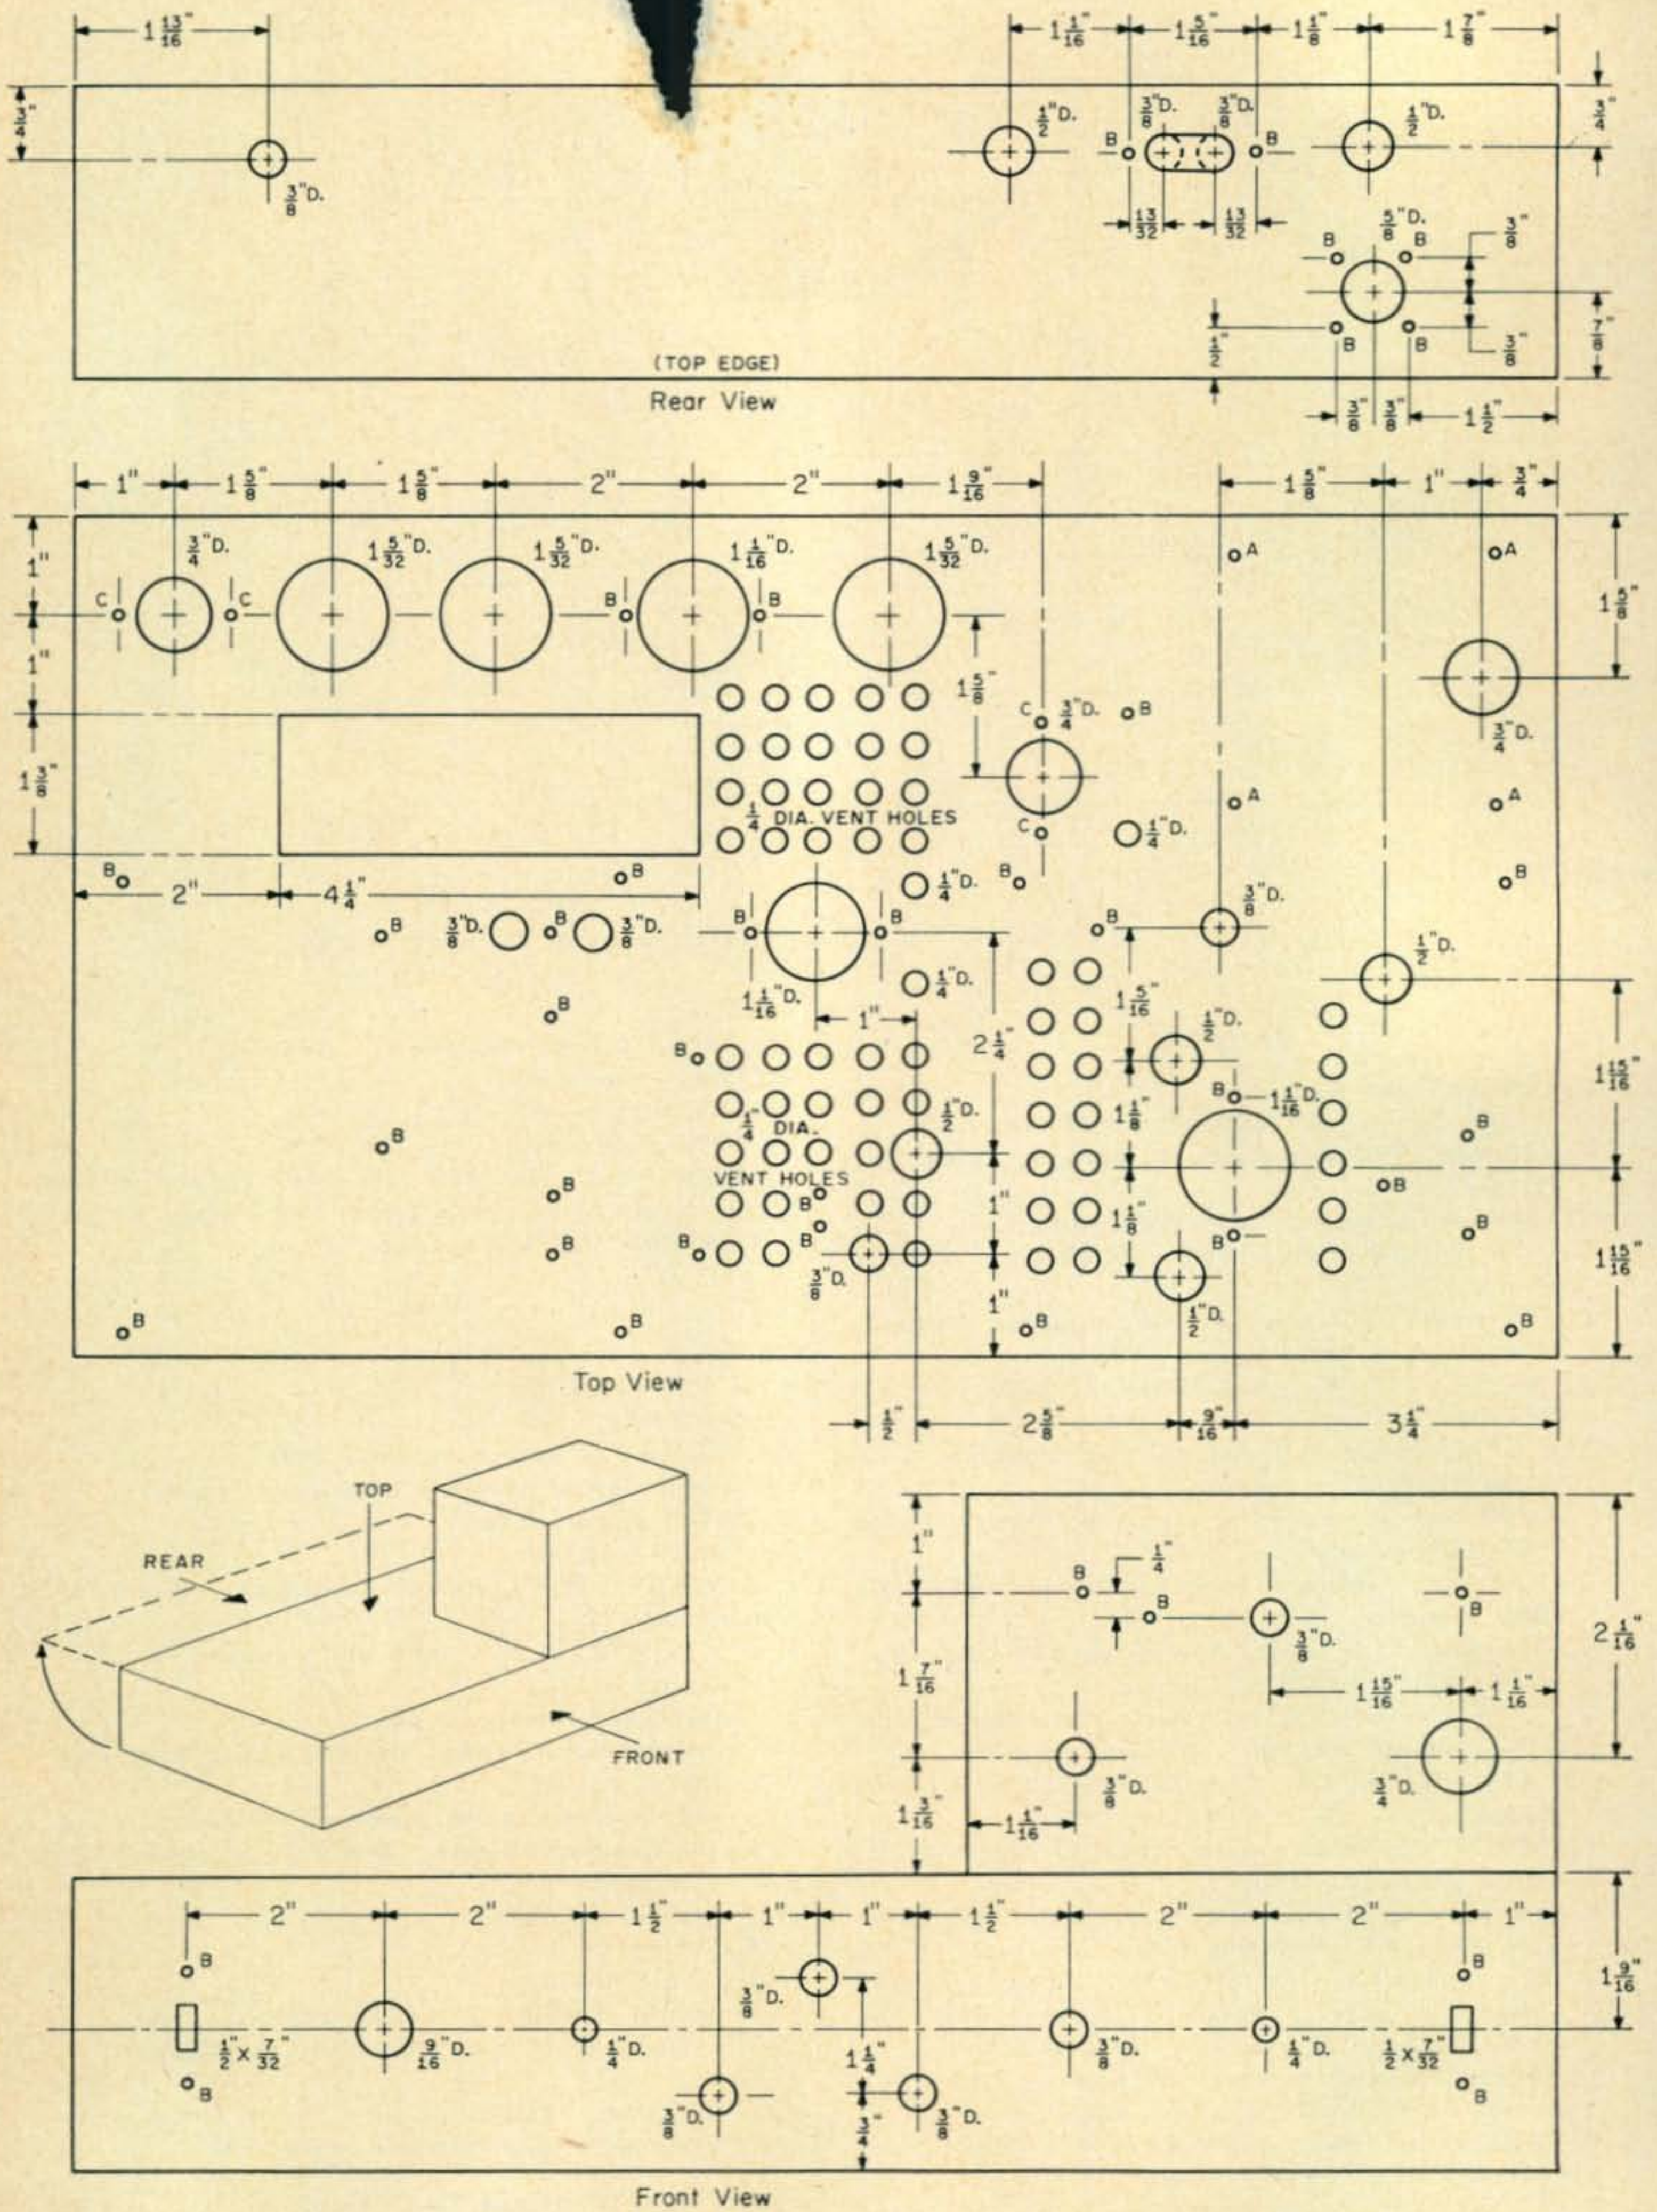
Dimensional layout of the major chassis cutouts required for the three step sideband project. Holes marked A are made with a #18 drill, B a #28 drill and C, a #33 drill. The oblong hole on the rear flange is made by drilling two $\frac{3}{8}$ " holes and filing away the
